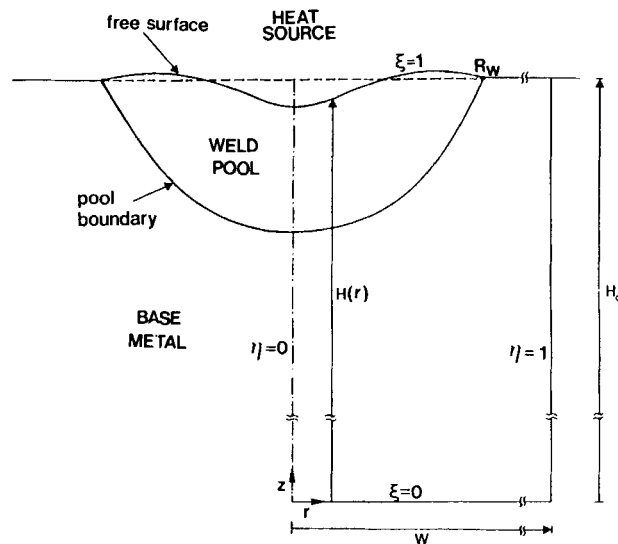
Schematic illustration of weld pool deformation and the co-ordinates used for calculating heat transfer and fluid flow in the weld pool.
